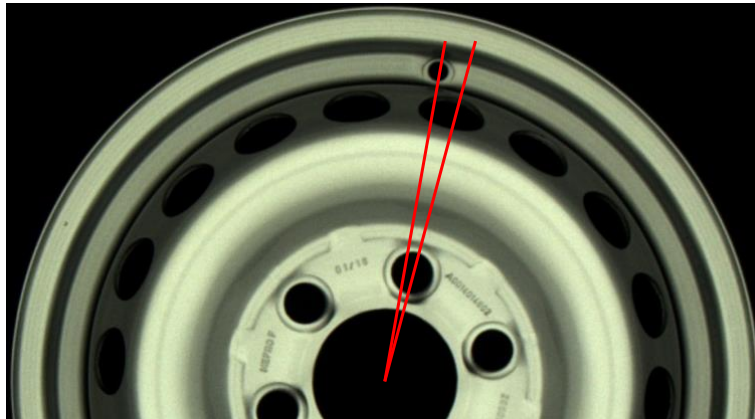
An example of a dimensional defect on the surface of the wheel
